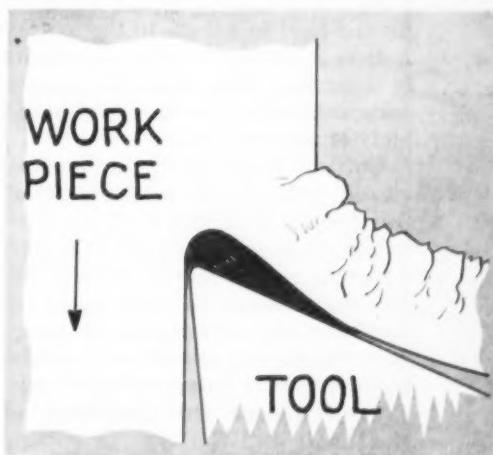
Ductile metal chips tend to weld to the cutting tool, thereby forming an excessive built-up edge on the tool, which results in machining difficulties, as well as a poor finish on the workpiece that is being machined.
